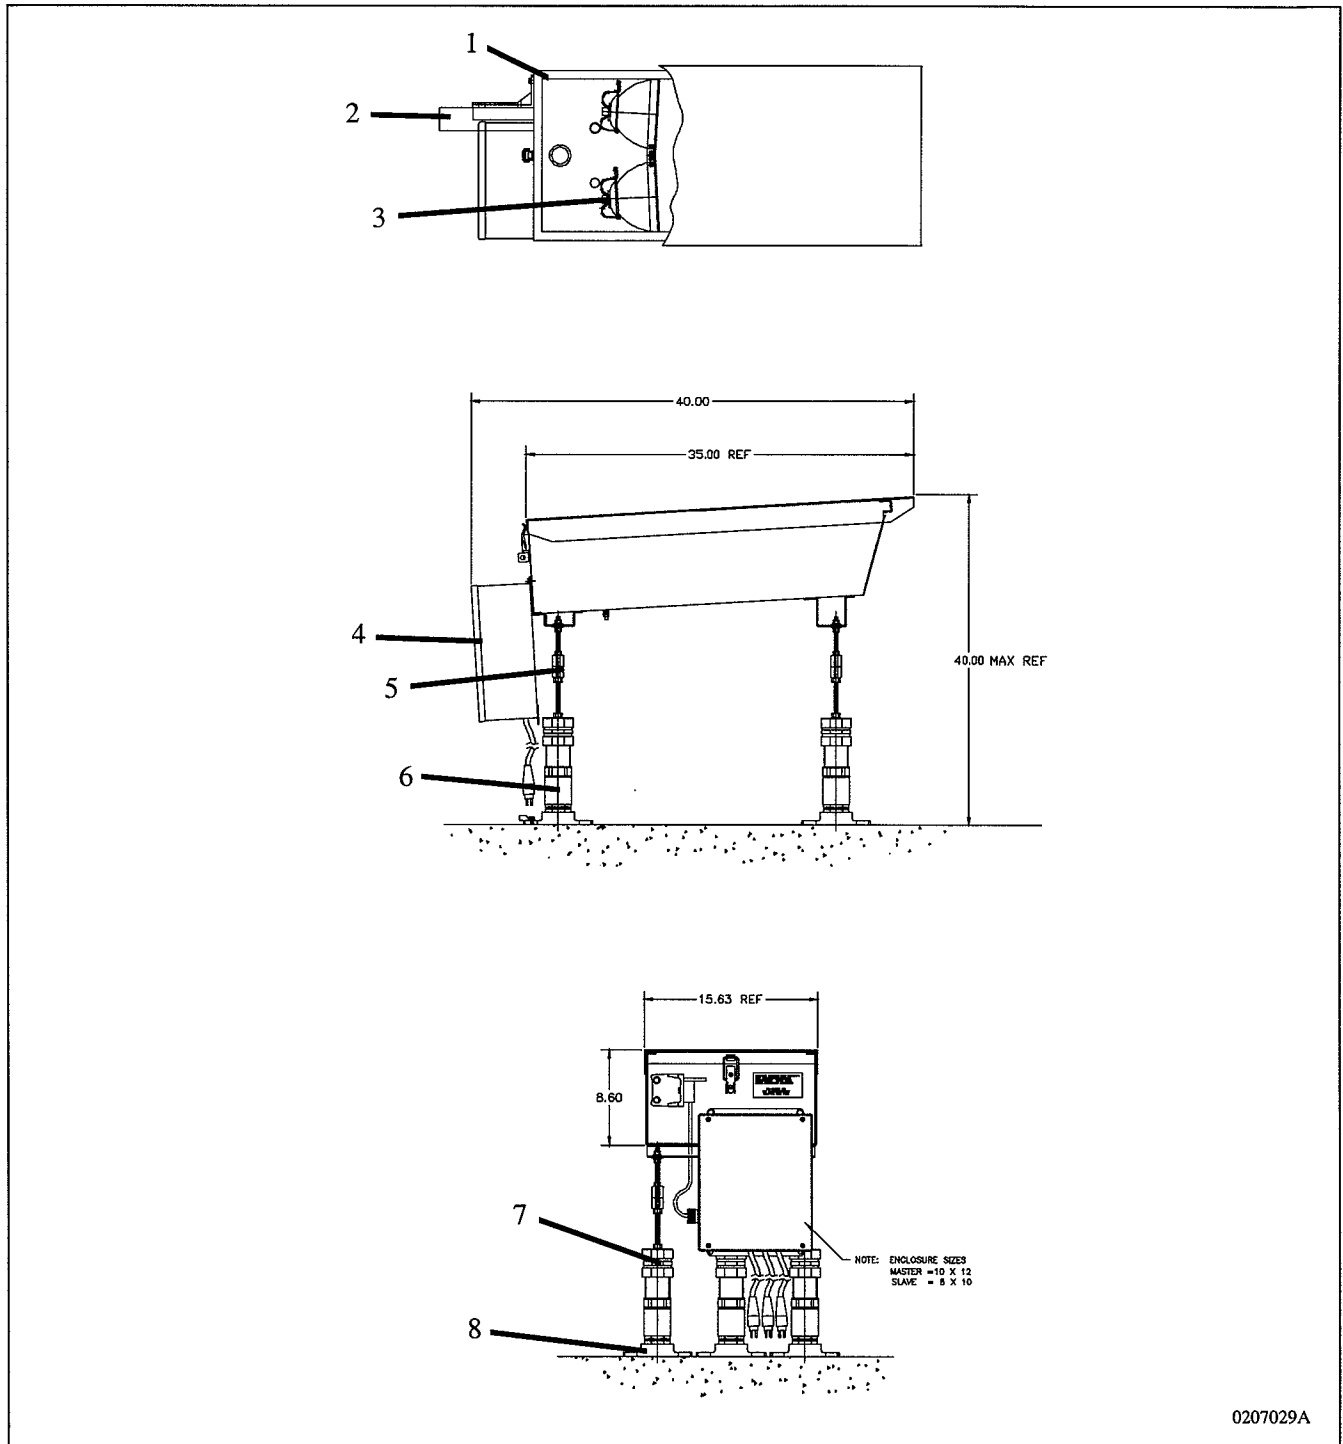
L-880/L-881 PAPI Optical Box Final Assembly
